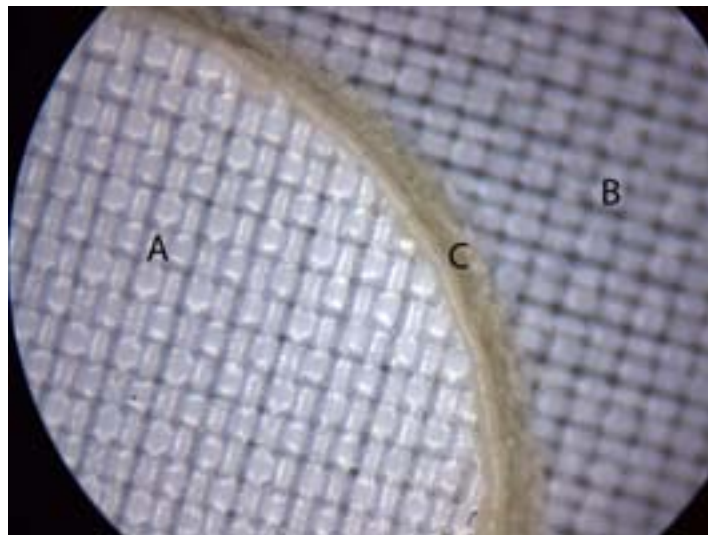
Two layers A (top) and B (bottom) joined by sintered weld (C), option c, top view
